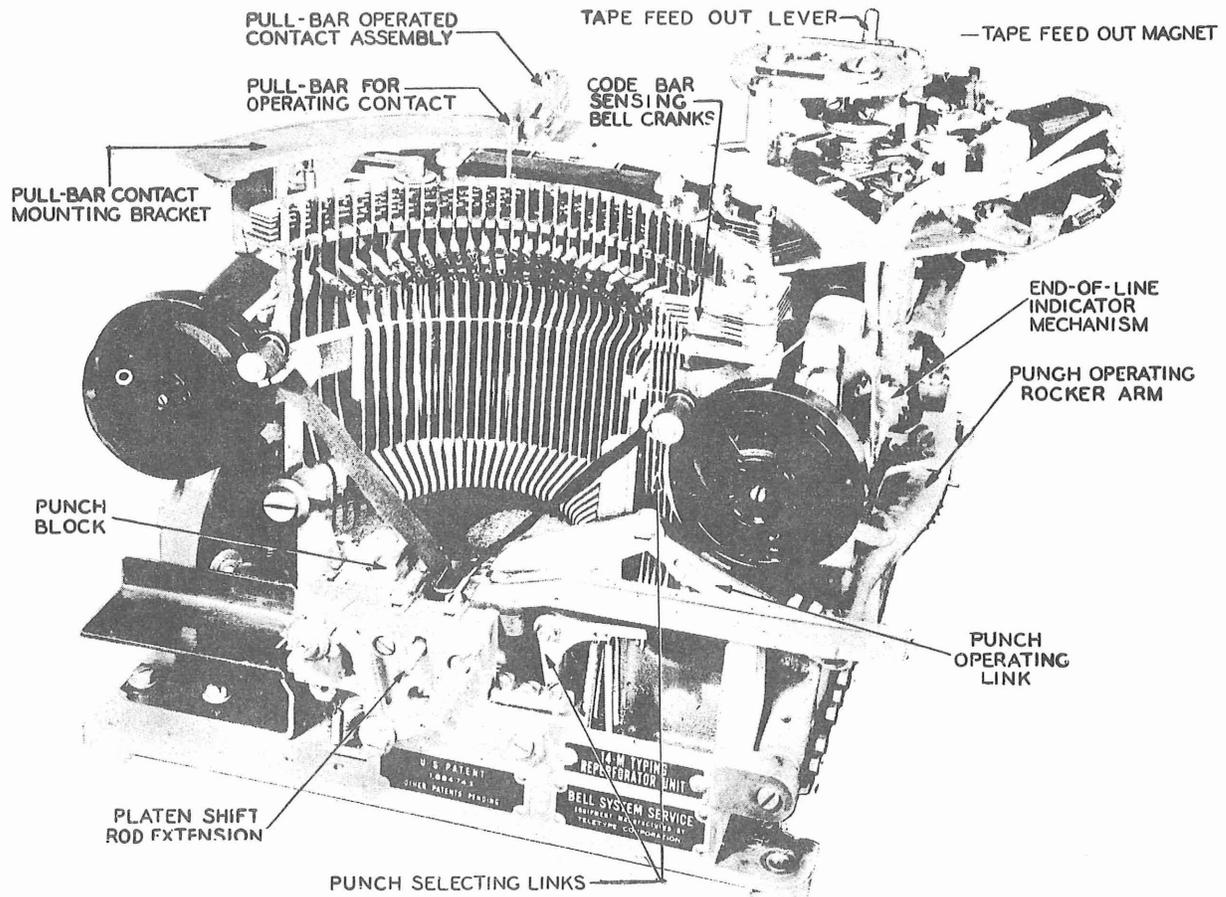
No. 14 Typing Reperforator Unit (Receiving Only - Cover Removed)
